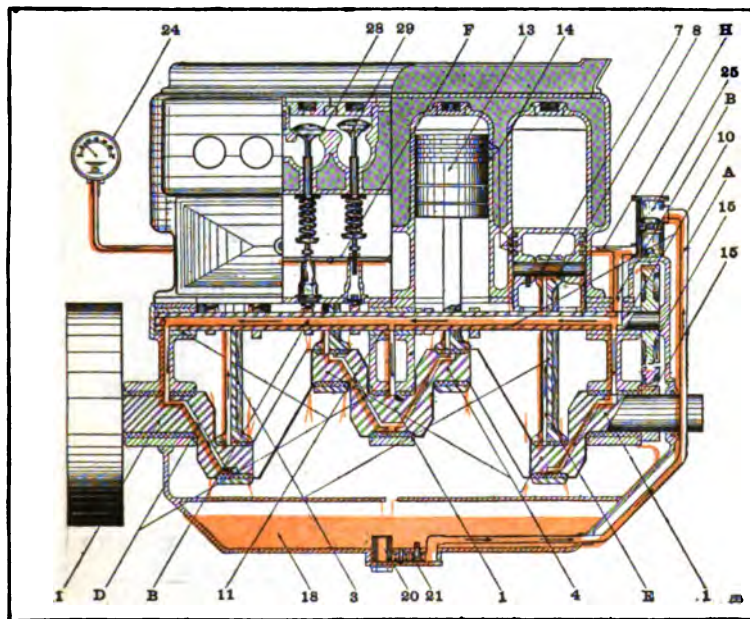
Sec. 10d.—Automobile engine with pressure-feed lubricating system. (Courtesy The Atlantic Refining Co.)
